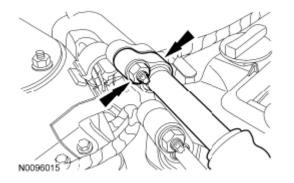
Locating A/C Tube Nut And O-Ring Seal Courtesy of FORD MOTOR CO.
